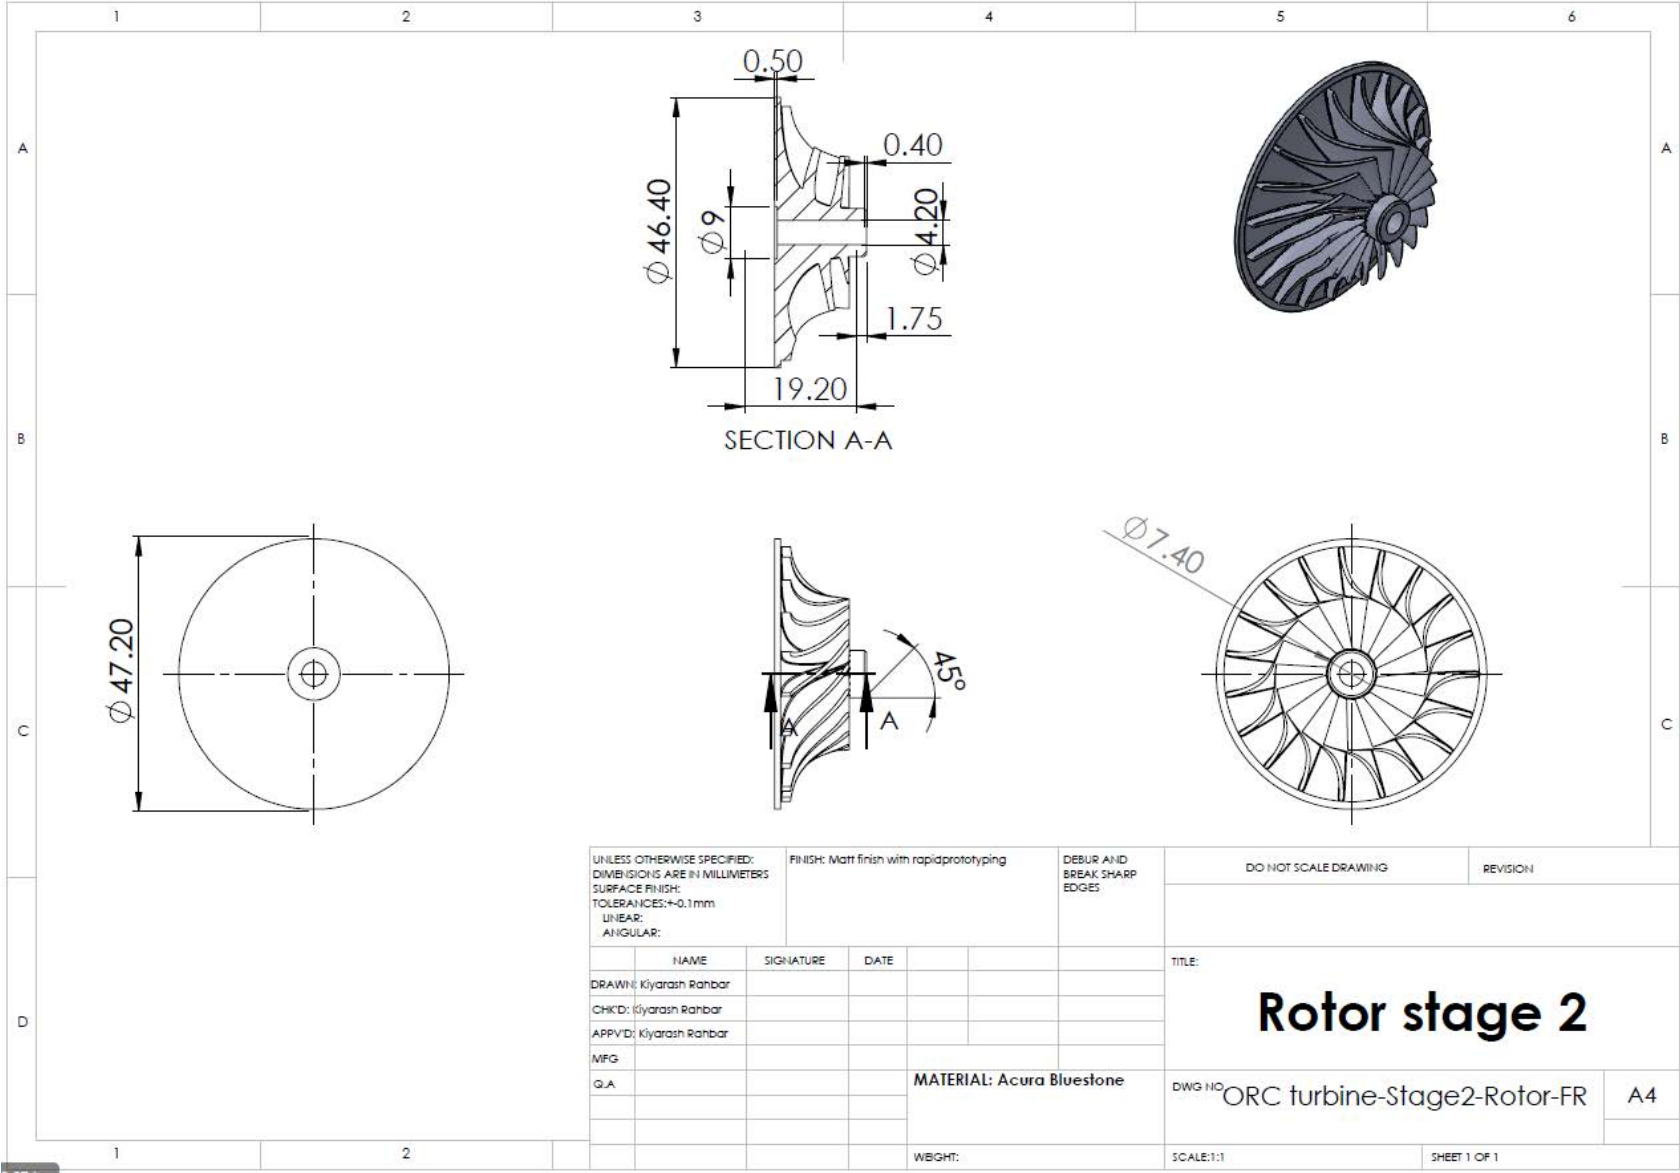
Rotor stage 2- detailed two-dimensional drawing
